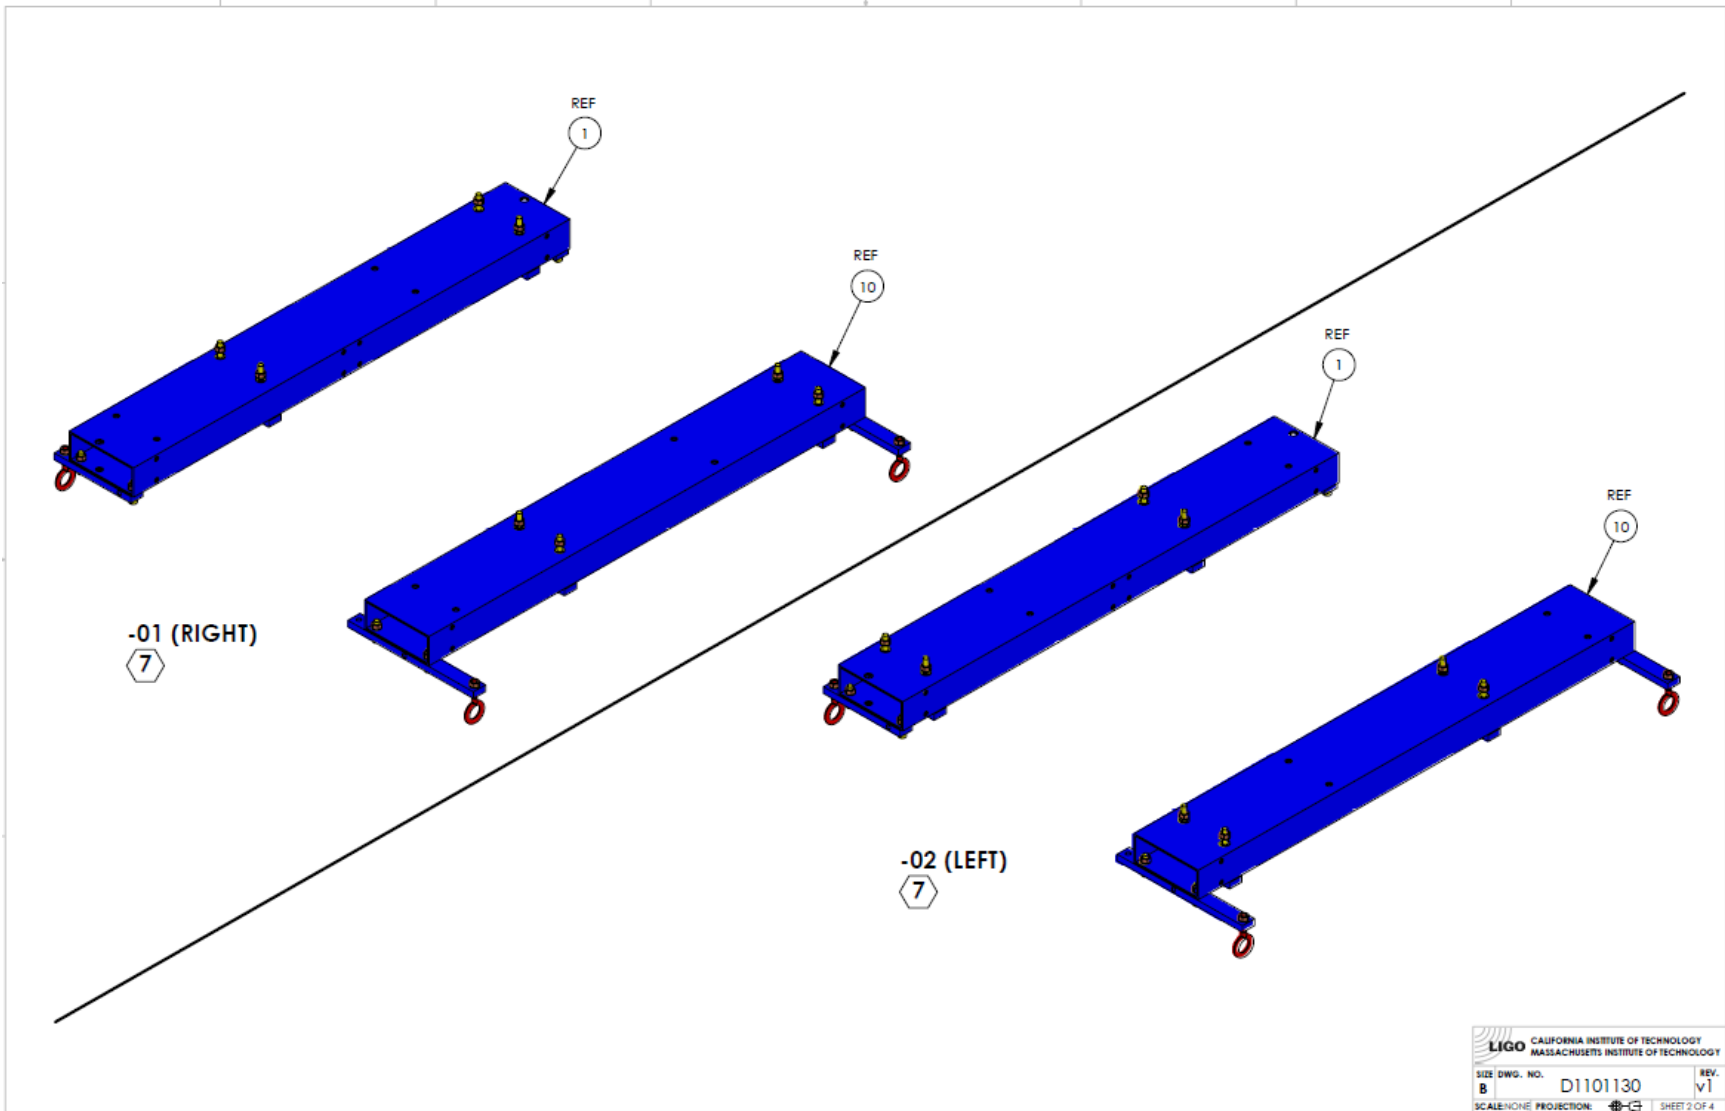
Modified TMS Wire Jig Assembly, with Loading Weight
